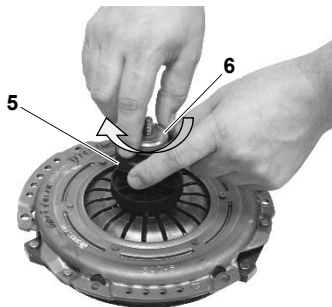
Turning the lock nut until it slightly touches the pressure plate.
